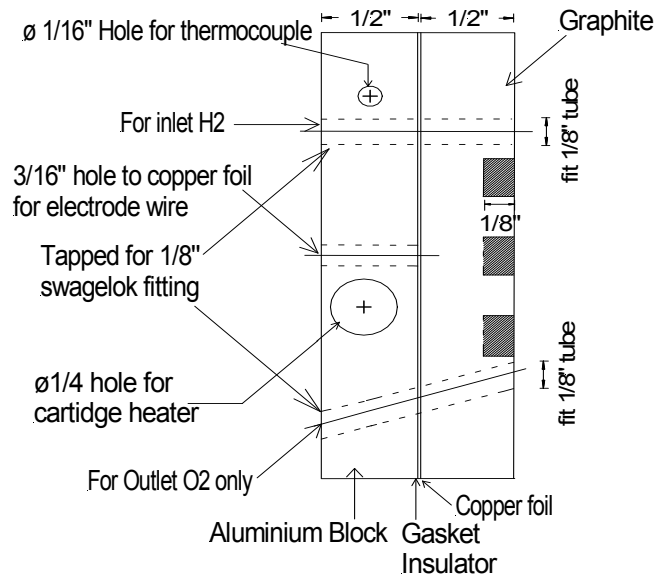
Schematic of side graphite plates and aluminum blocks with copper current collector and gasket insulator placed in between the two blocks. Heating rods were placed in the aluminum blocks at both ends of the stack.
